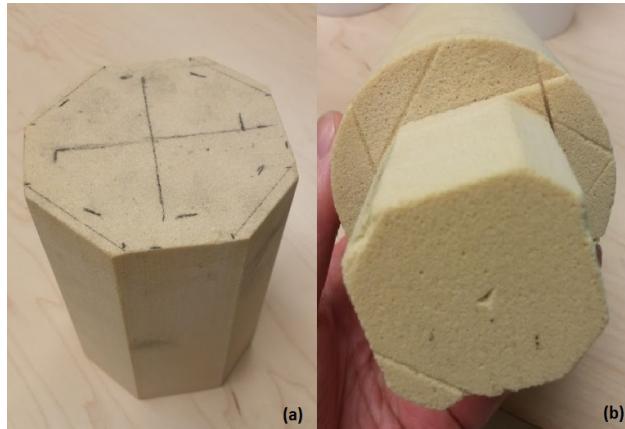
(a) machinable foam prior to turning into cylinder; (b) Knob to secure into chuck
